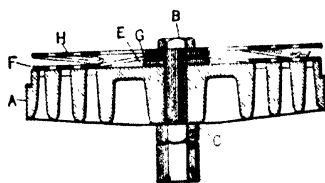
Section of Ingersoll-Rand Plate Valve, Assembled.
